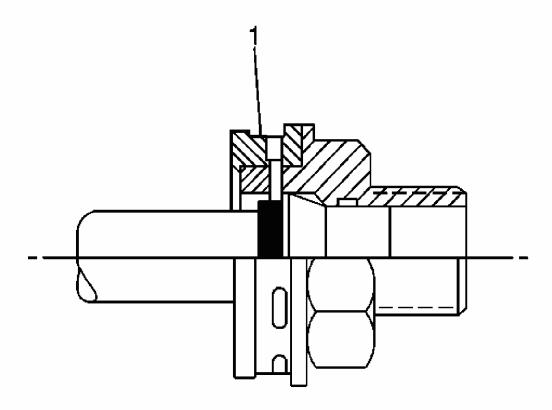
View of Plastic Caps Over Quick Connect Joints Courtesy of GENERAL MOTORS CORP.
